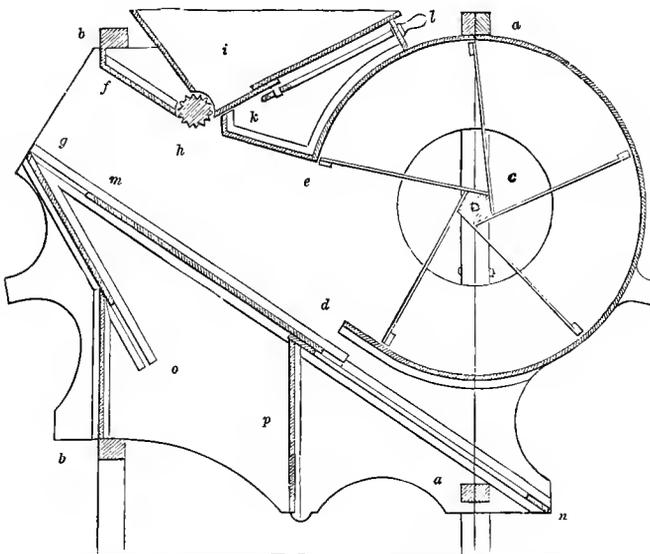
Longitudinal section of the finishing-fanner or duster.
